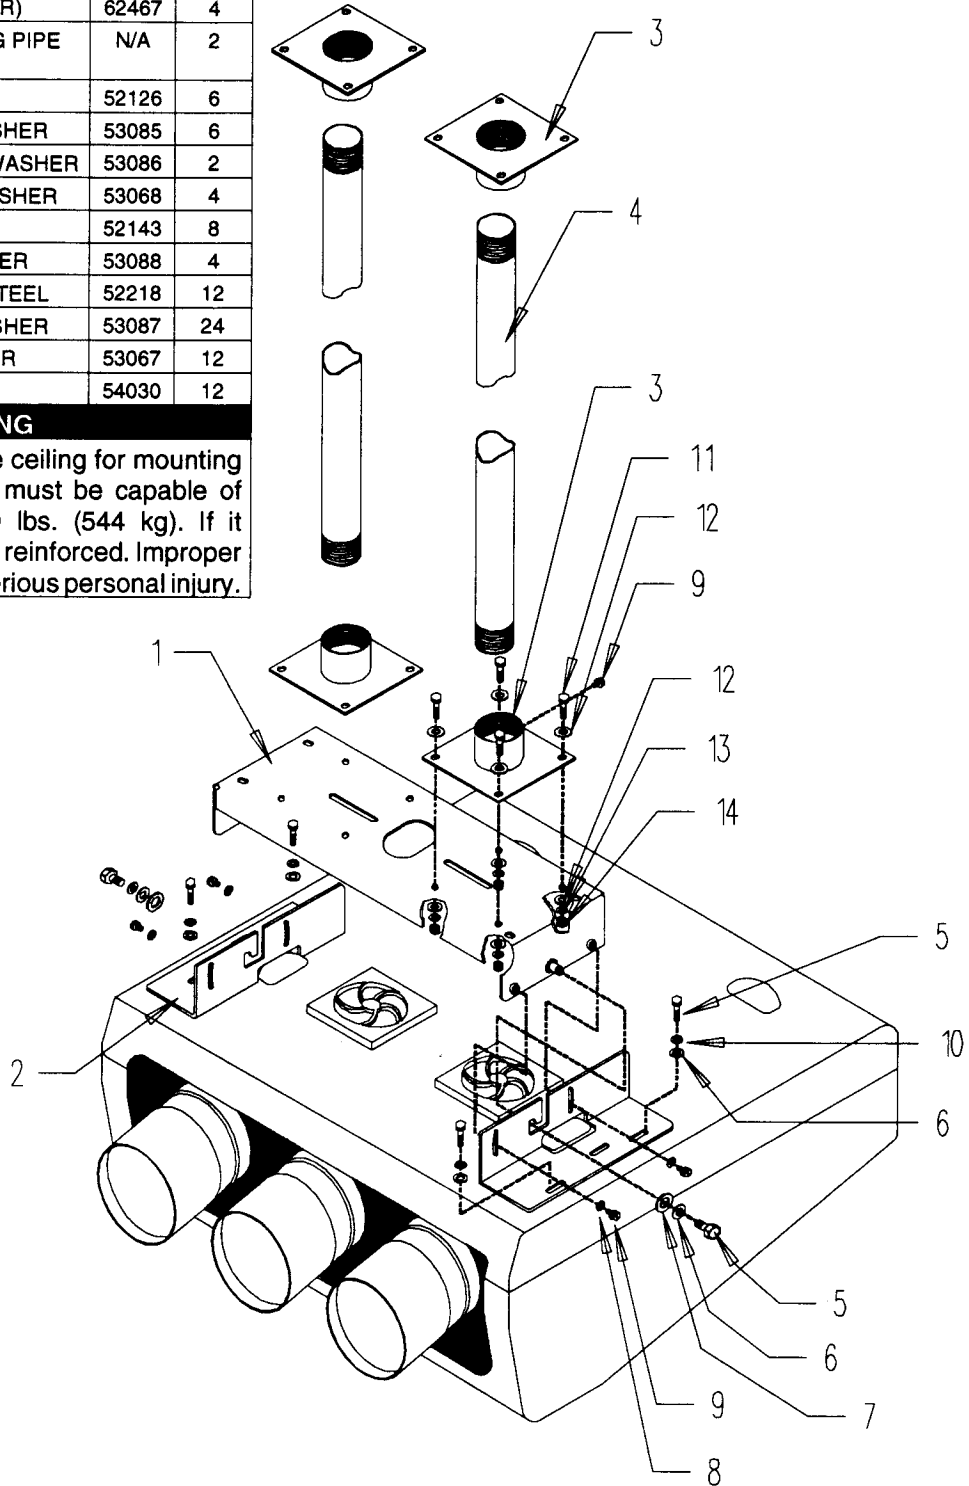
AMPRO 4600 CEILING MOUNT EXPLODED VIEW.
